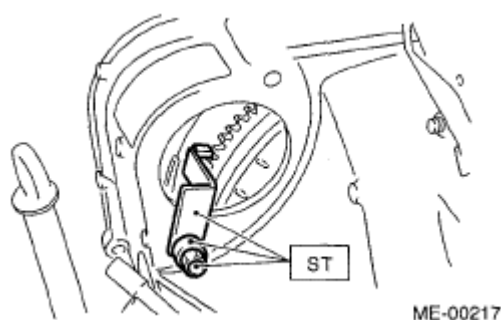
Identifying Stopper Set 498277200 On Torque Converter Clutch Case
